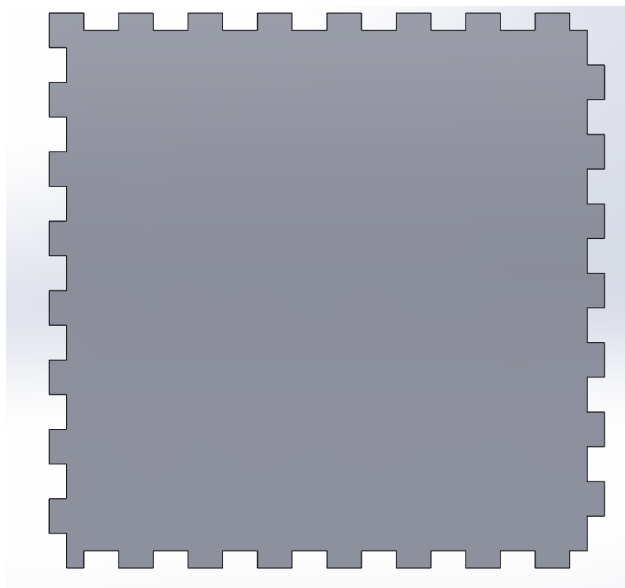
Example of One Wall of the Birdhouse CAD Piece
